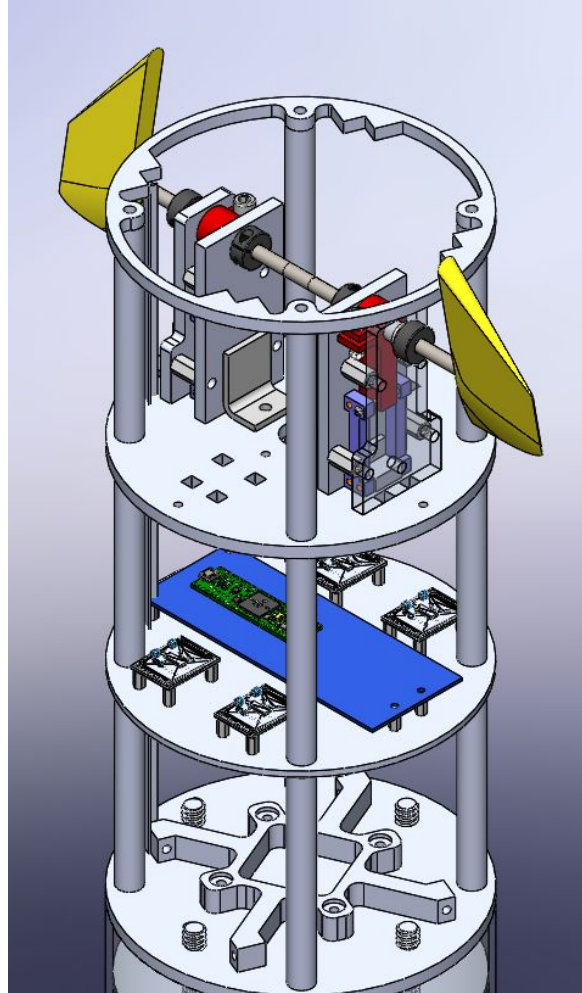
(left) This is the integrated internal assembly. The existing threaded aluminum rods that act as standoffs in the assembly are bolted into the holes on the mounting plate. The shaft with the canard fin has to be pushed into the mounting plates after the carbon fiber airframe is slid over the internal assembly, but does not have to be removed at any point during the wind tunnel test.
